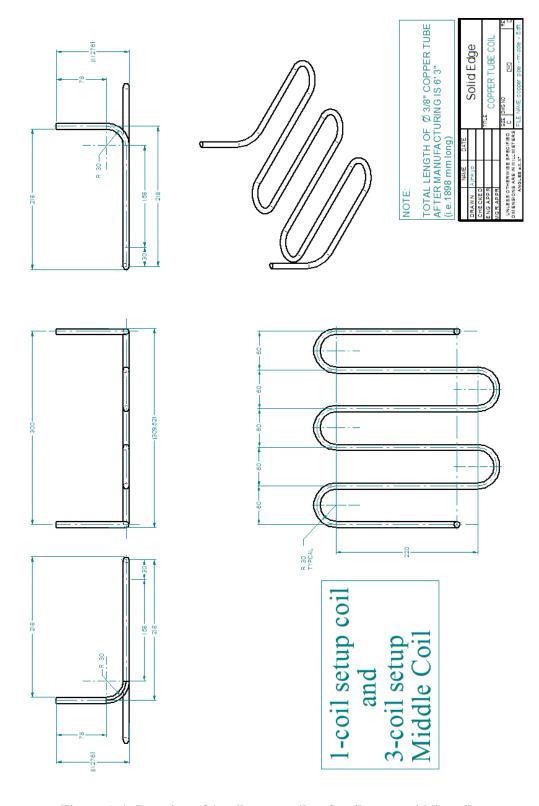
Drawing of 1-coil setup coil or 3-coil setup middle coil.
